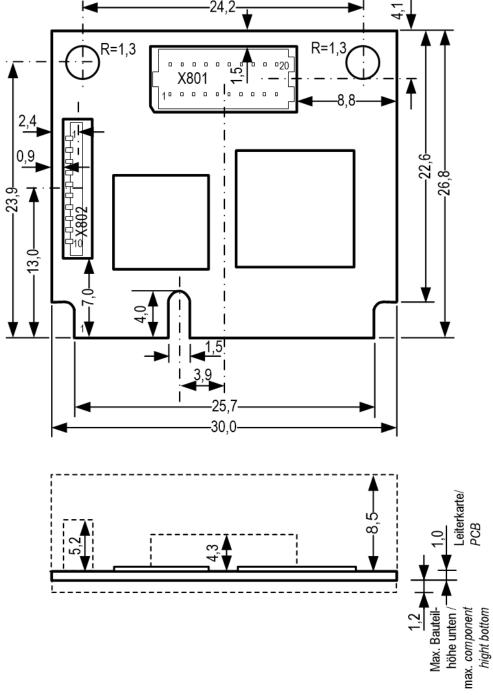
Dimensions CIFX HPCIE90 (Revision 4)
